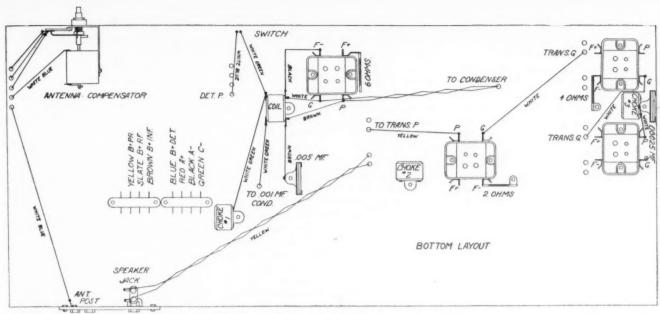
Arrangement of Parts on Bottom of Steel Base
